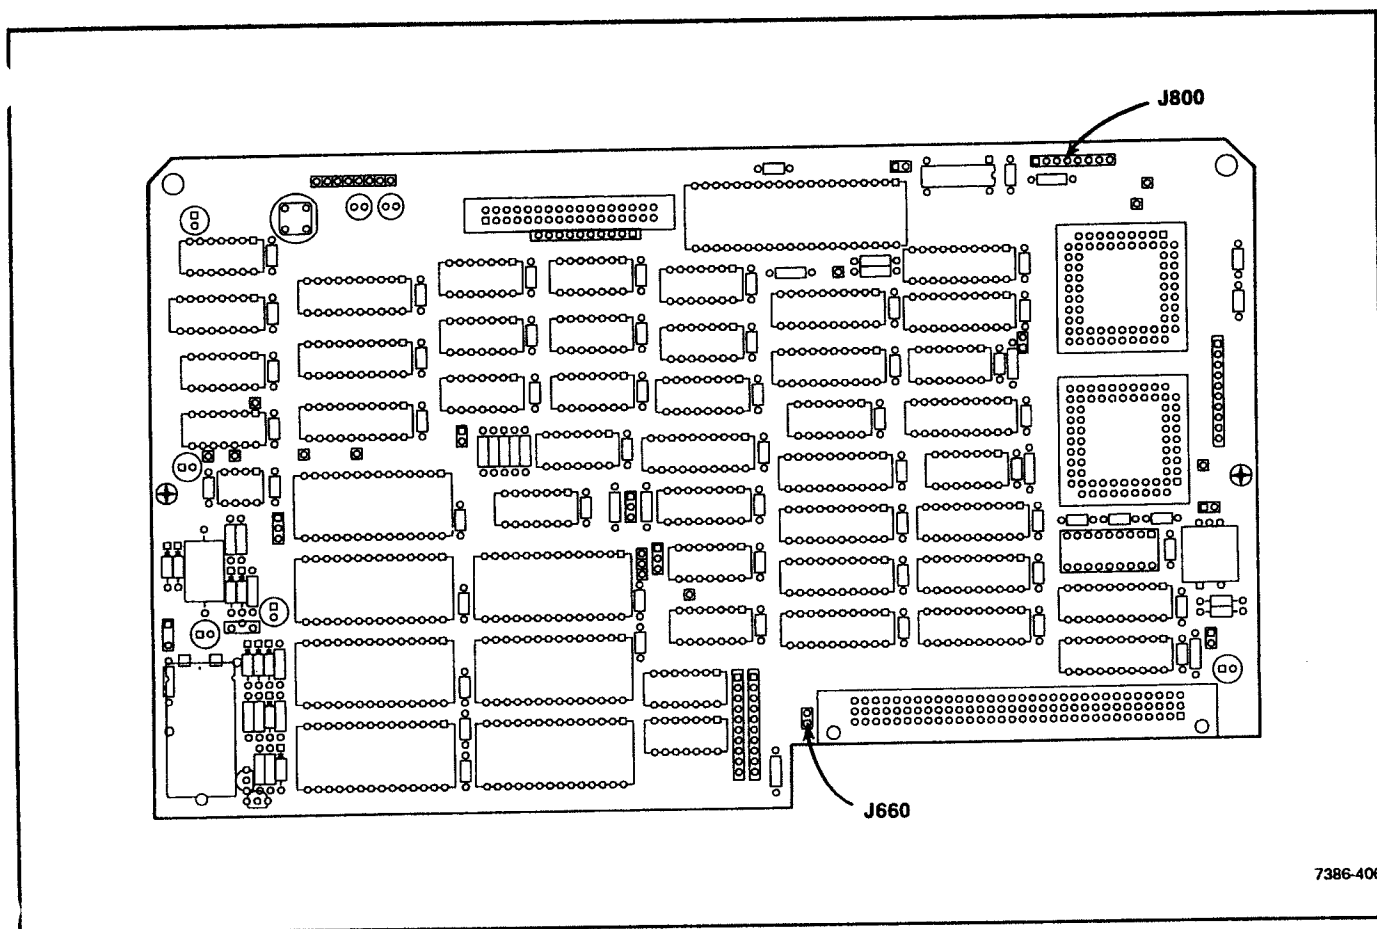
Main Processor Board (A17) showing Executive Kernel Test jumpers.
